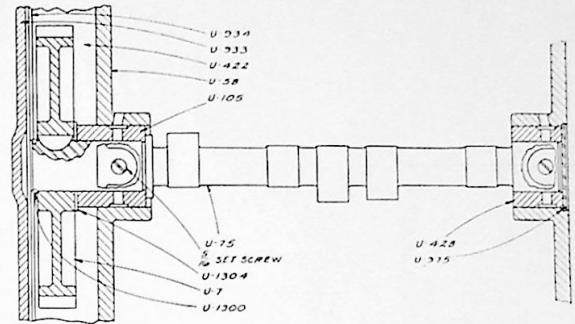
Model UF and HU. Detail of camshaft and gear assembly, used after engine serial 20096.
